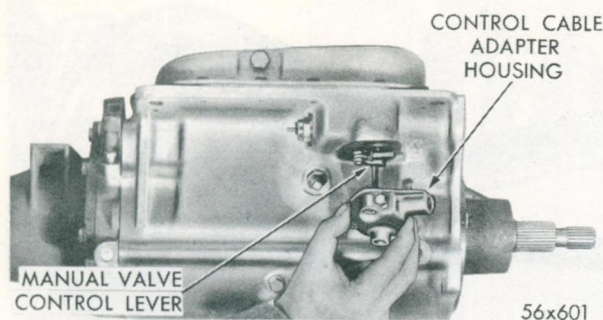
Removal and Installation of Control Cable Adapter Housing
